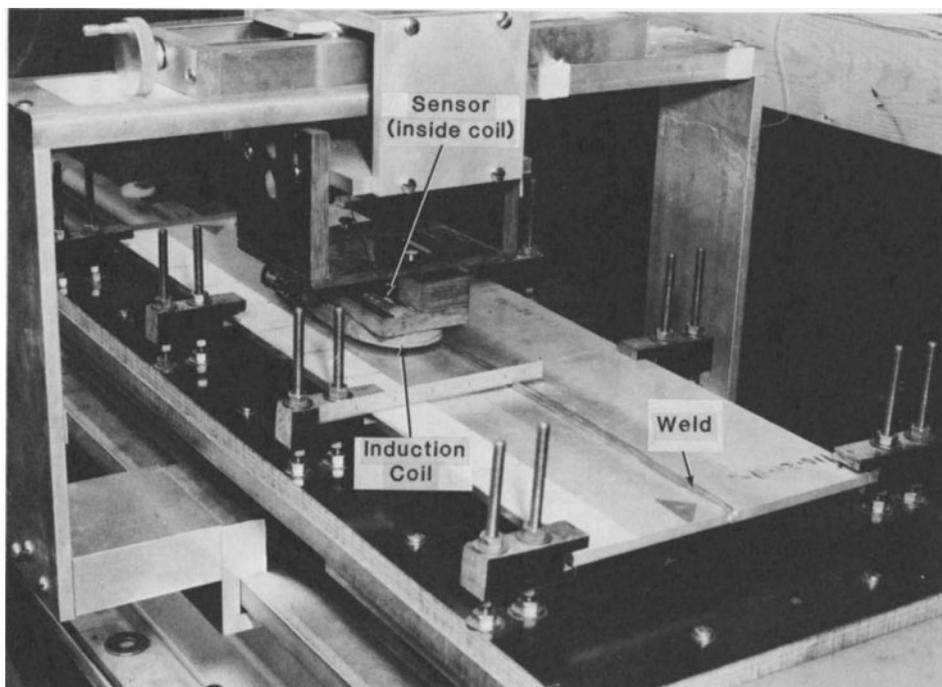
ECP experimental setup for welded panel investigation.
